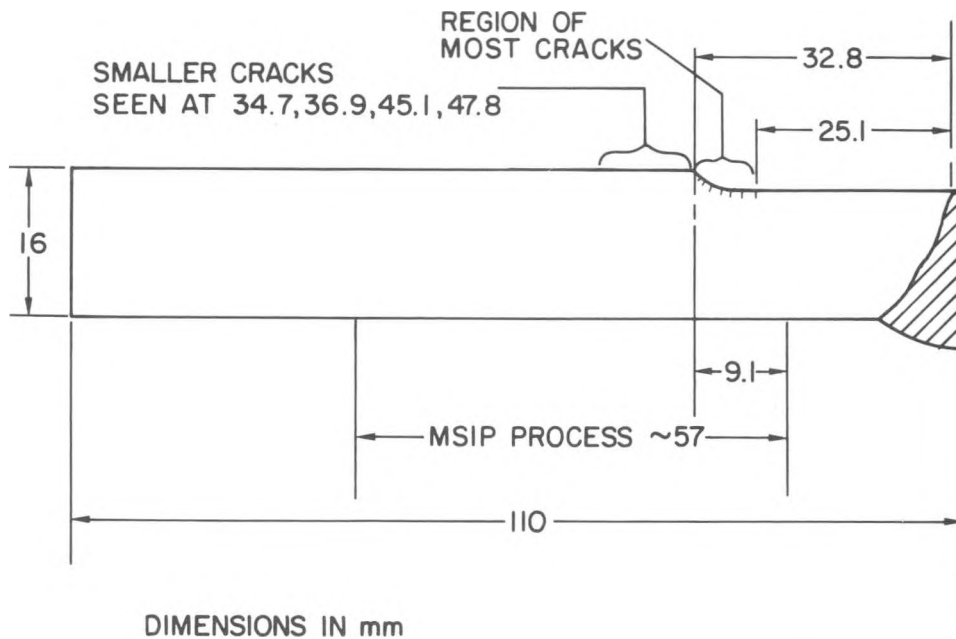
Cracks at Fillet of Counterbore in 12-in.-diameter MSIP-Treated Weldment.
